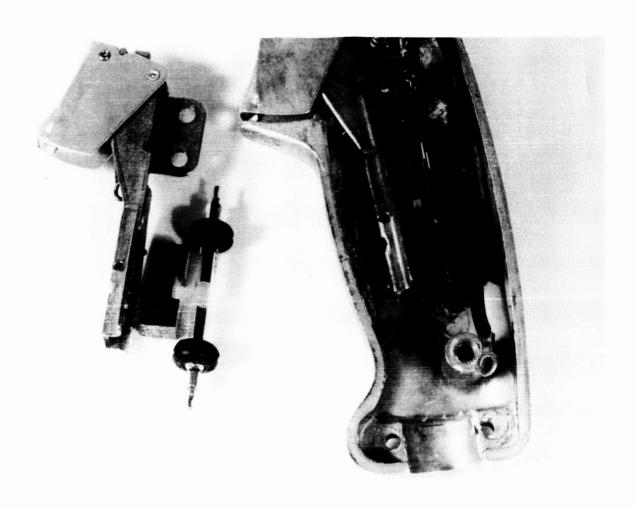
MODIFIED TRIGGER MECHANISM AND MODIFIED TRIGGER INSTALLED
